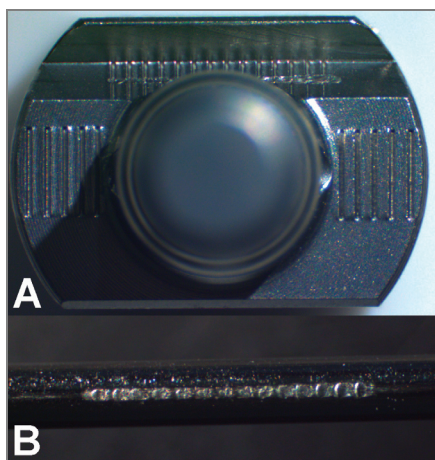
A photograph of a TrueLok™-bolt (A) and a wire at the clamped wire end (B) (tightening torque of 14 Nm); the slotted part of the bolt was used in the test run
